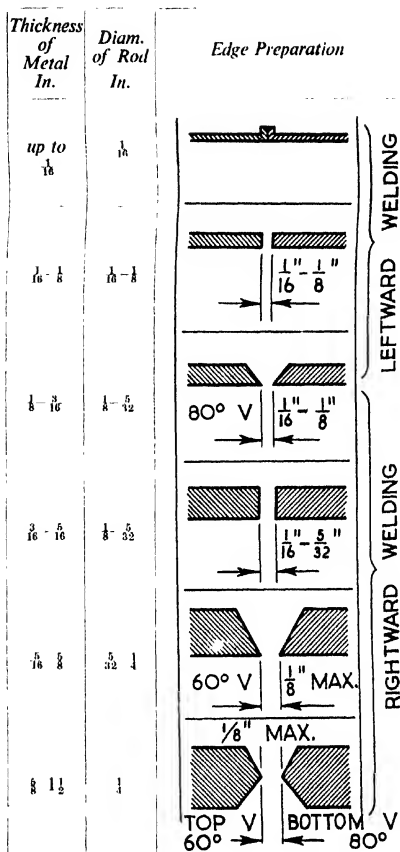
EDGE PREPARATION FOR DOWNHAND BUTT WELDS IN STEEL
